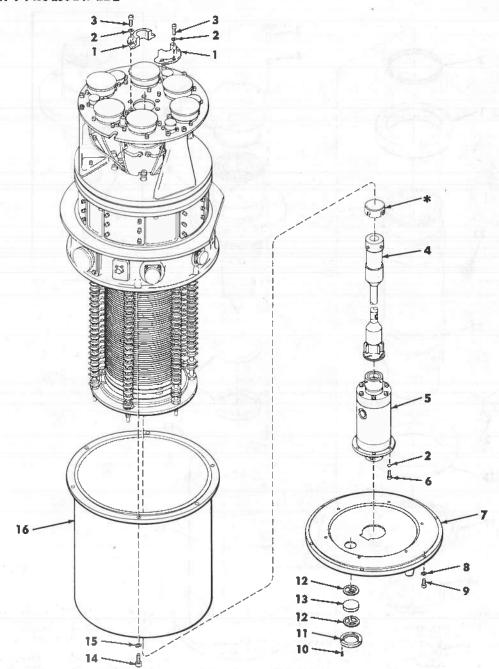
CONNECTOR ASSEMBLY, ELECTRICAL /8171940/-EXPLODED VIEW /SEE FIGURES 60 AND 67 FOR NEXT HIGHER ASSEMBLY/
